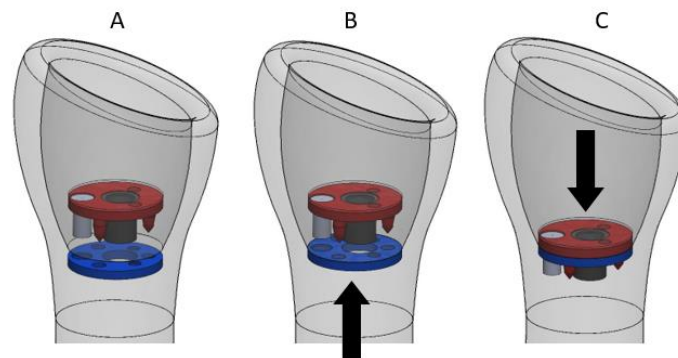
Three-step assembly instructions for the faceplate and probe cover.
